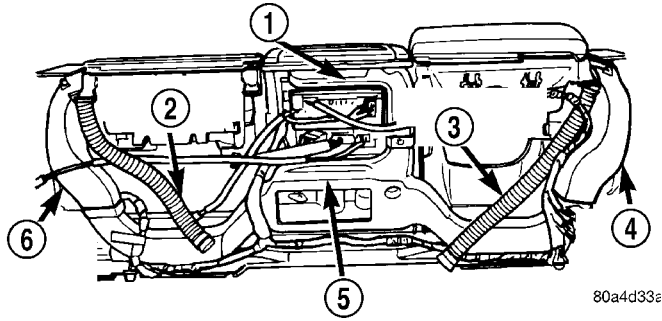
Instrument Panel Ducts - LHD Shown, RHD Typical
